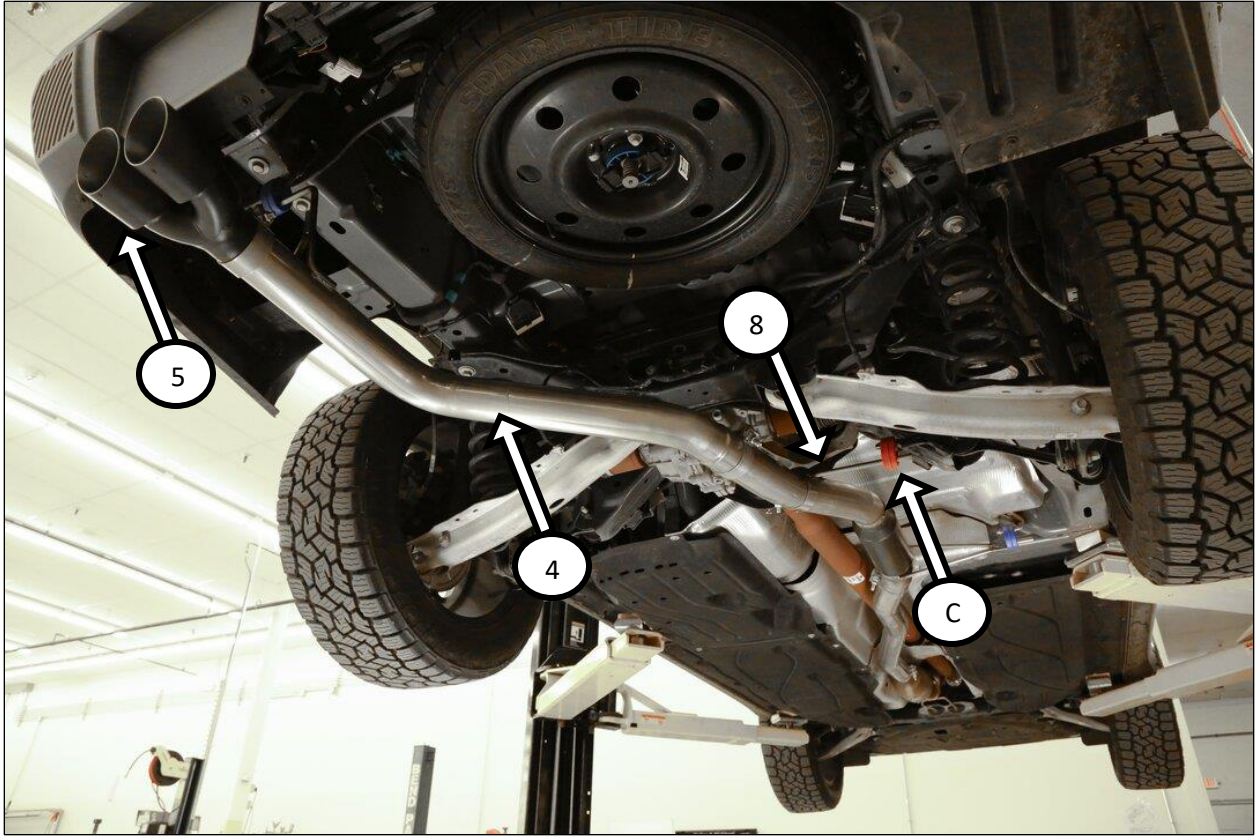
(All Wheel Drive with Rear Exit tailpipe)
